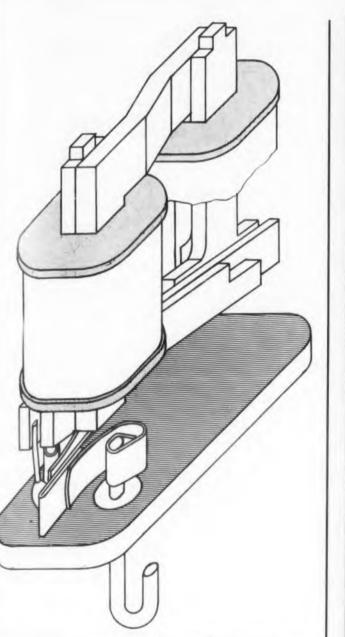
Relay construction. "Wipe" is caused by the slide-and-deflection of the dpdt contact assembly, as the glass bead shoves the contact over. Arcing is kept to a minimum. Use of a torqued frame for the double coil assembly permits a straight armature—good news for the production quality control department.
